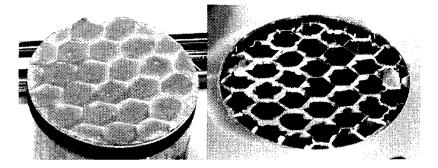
Failure surfaces resulting from tensile testing of the Untreated honeycomb and AF130-2 adhesive control specimen, indicating a mixture of cohesive failure and fillet bond pull-out.
